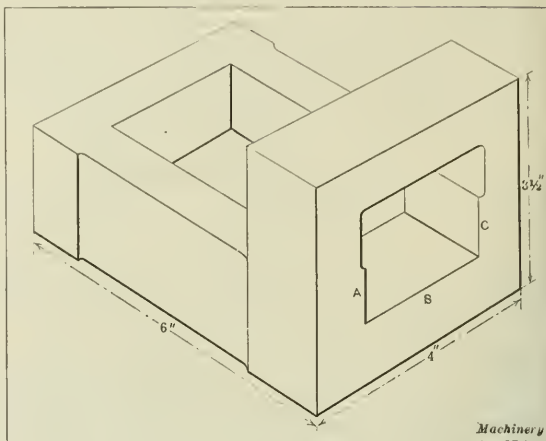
Jig Casting with Solid Bridge for Set-screw
